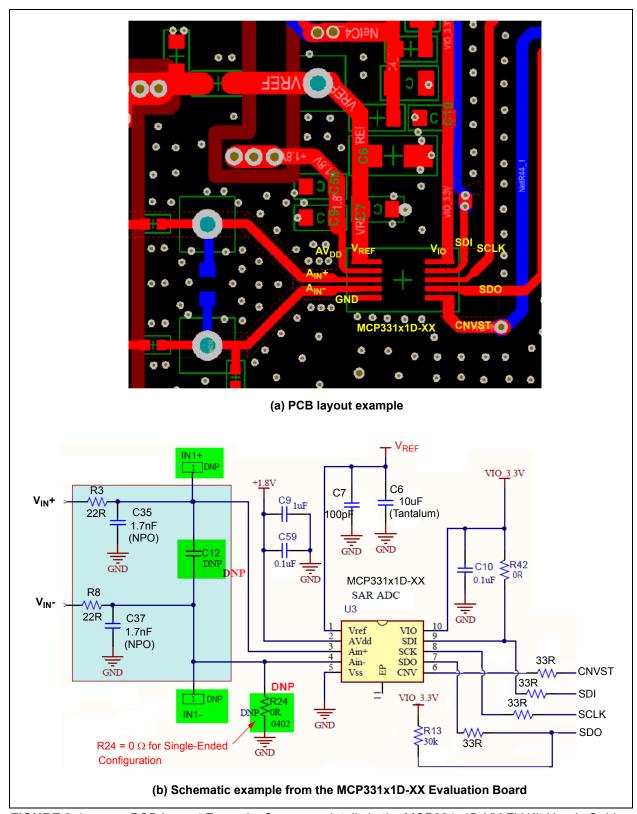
PCB Layout Example: See more details in the MCP331x1D-XX EV Kit User's Guide.
